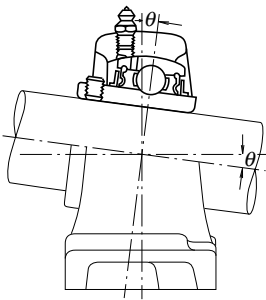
Permissible Misalignment of Ball Bearing Units
